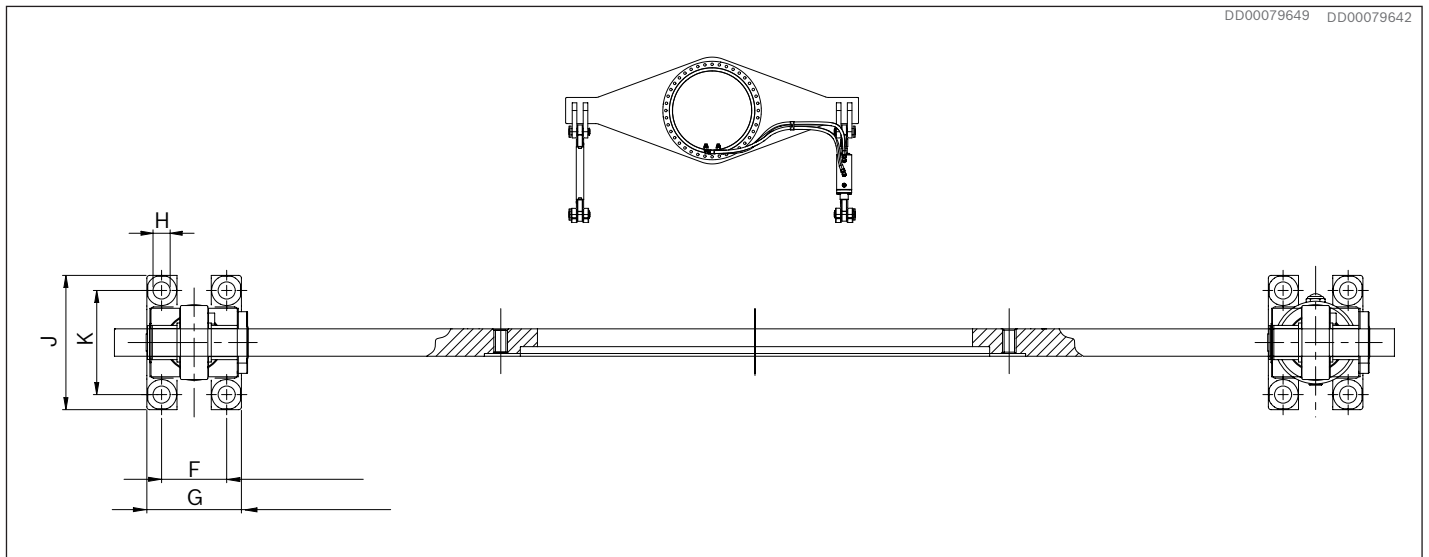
Dimensions double ended torque arm DTCA, DTCB, DTCBM
